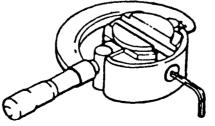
Adjusting Fuel Injection Pump Roller-to-Roller Dimension.
